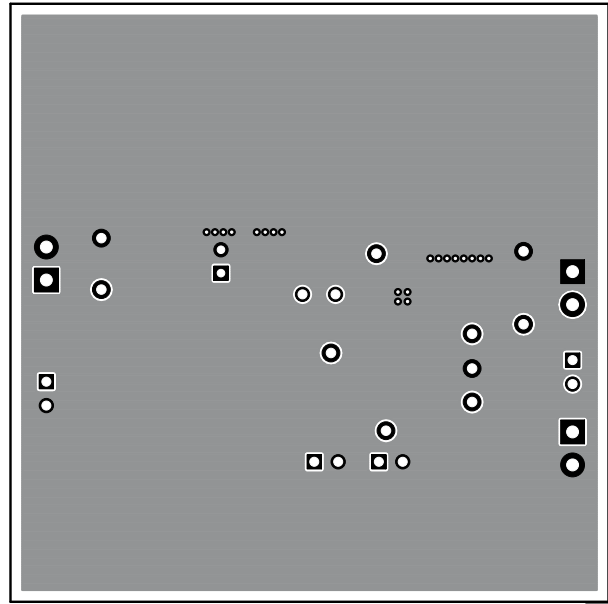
TPS54521EVM-607 Bottom-Side Layout (Bottom View)
